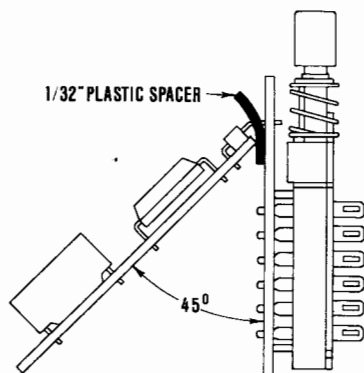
HOW THE PC BOARDS ARE ALIGNED prior to mounting in the custom *Digi-Toll* cabinet.
